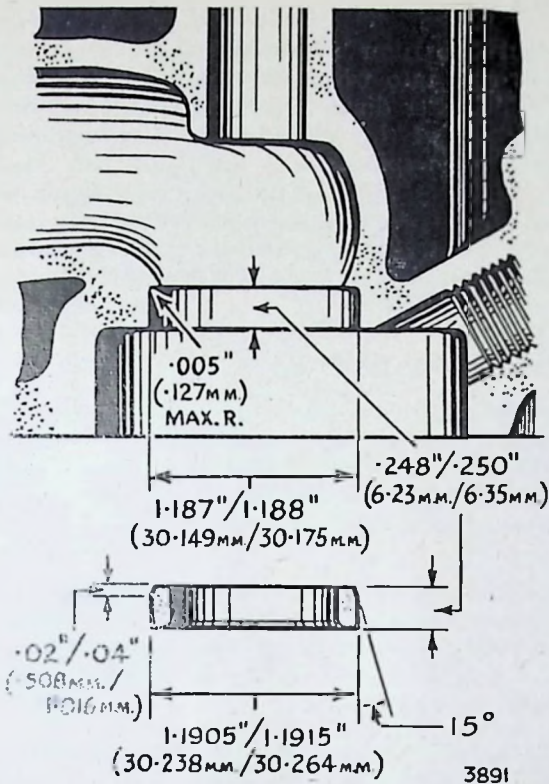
Details of the exhaust seat inserts. (O.H.V. engine).
